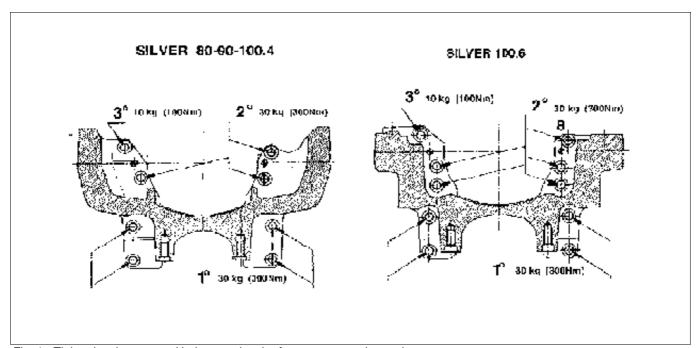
Tightening the nuts and bolts securing the front support to the engine.
